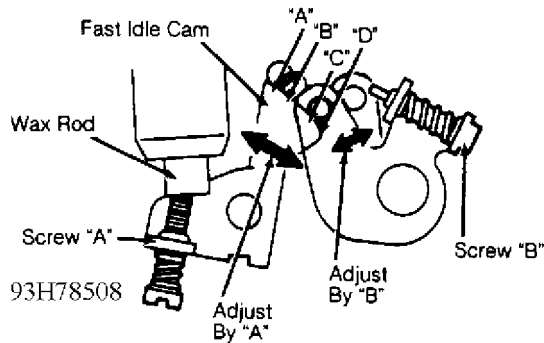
Adjusting Fast Idle Cam Opening (RX7)
